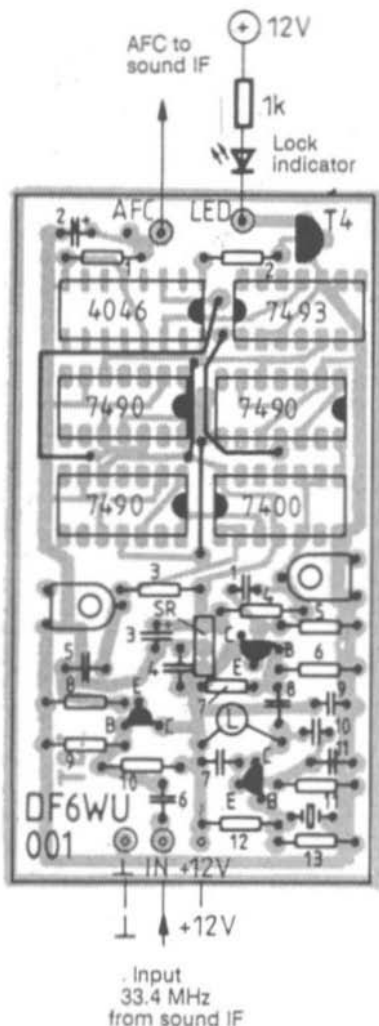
The PCB DF 6 WU 001 is fully copper coated on the component side
